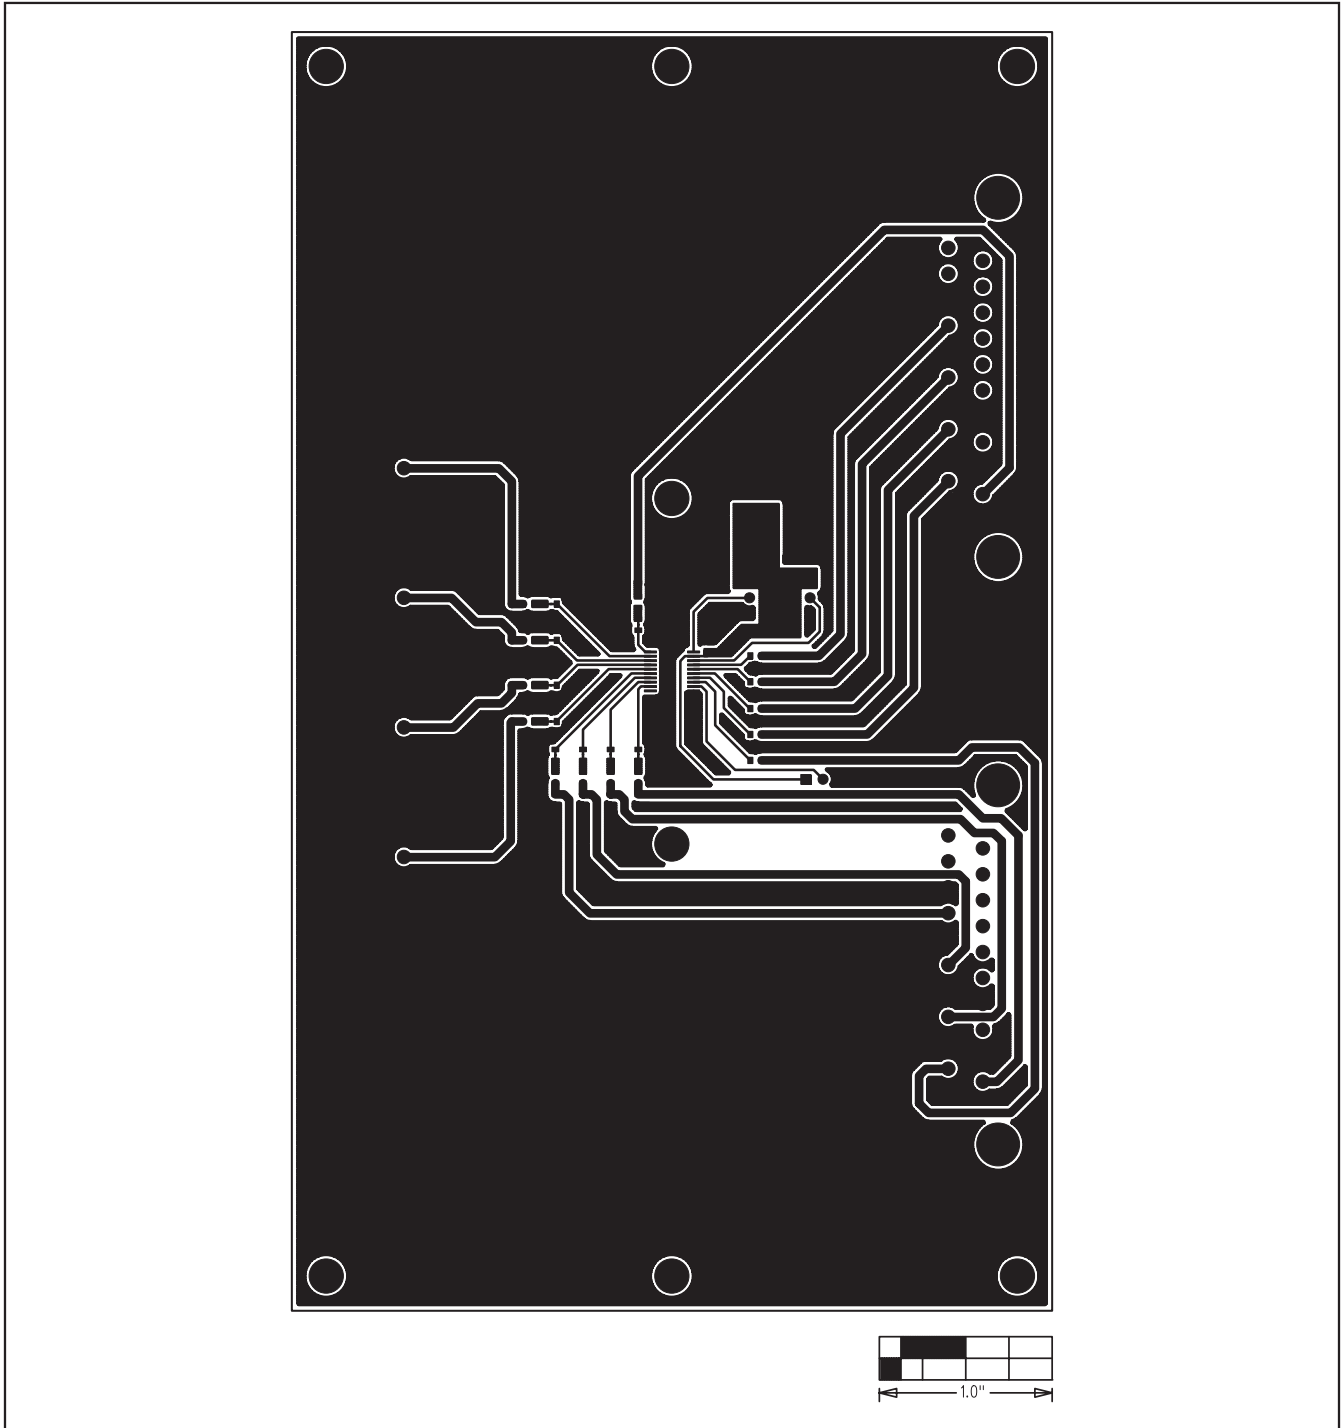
MAX9656 EV Kit Component PCB Layout—Component Side
